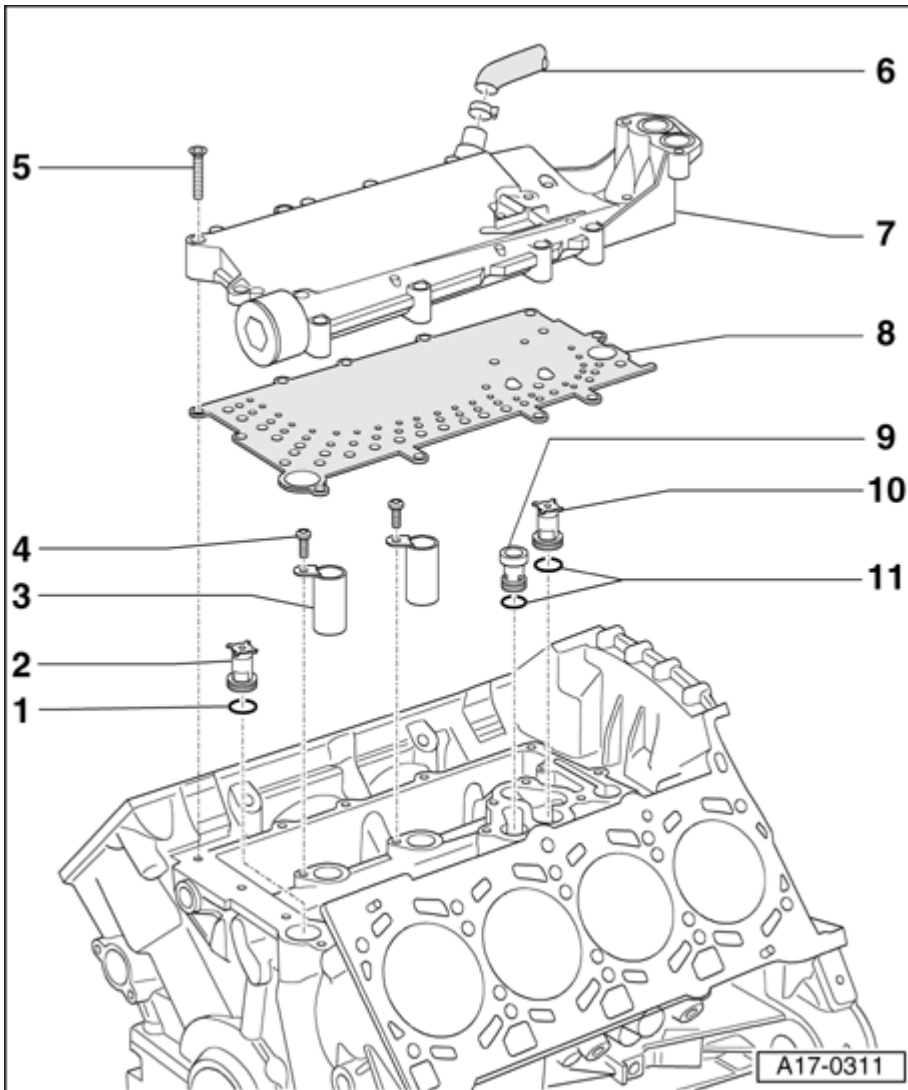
Oil Check Valves And Spray Nozzle Valve, Component Overview
